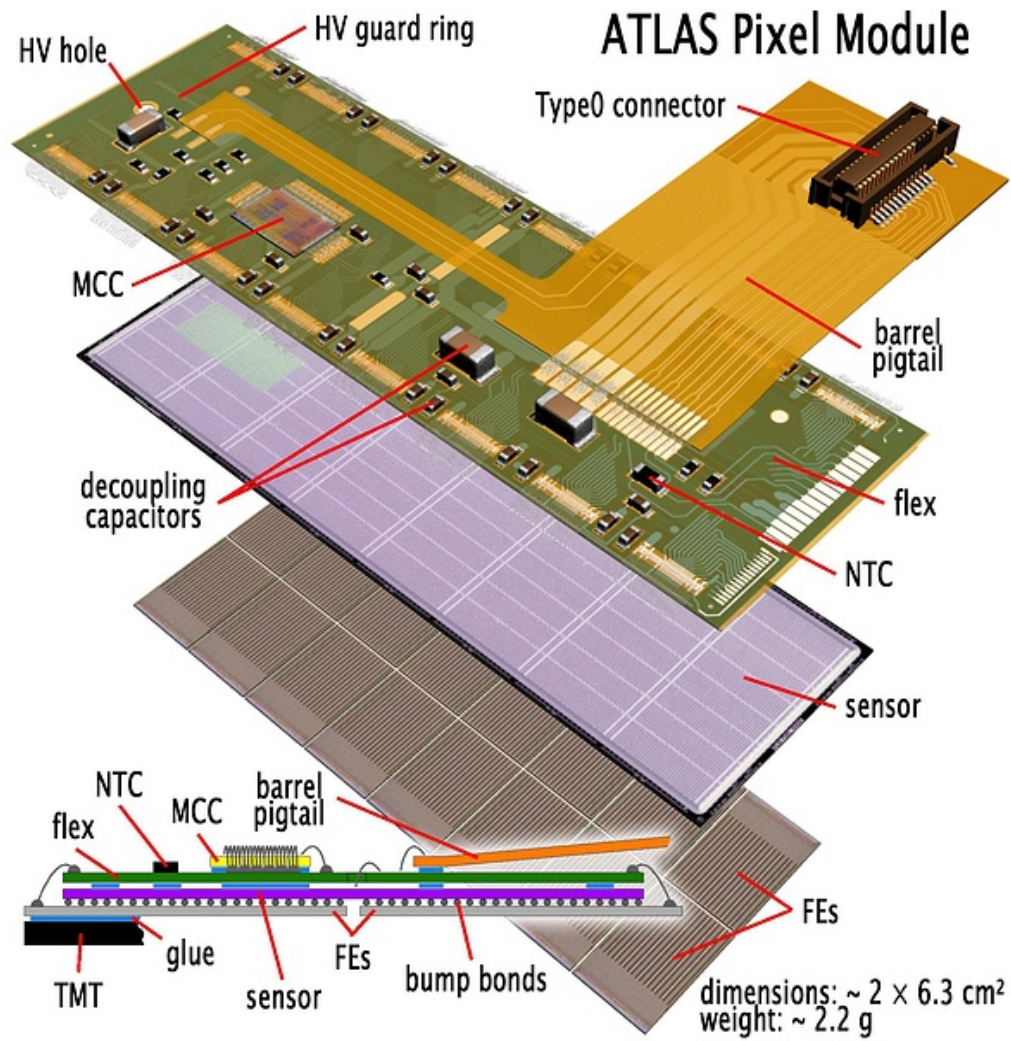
Technical drawing of the ATLAS pixel module [16].
